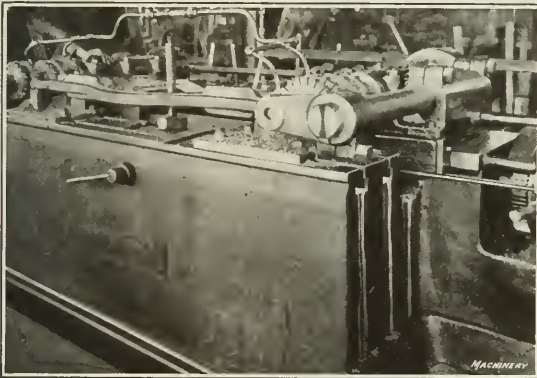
Arrangement of Pipes to deliver Cutting Compound to Two Gangs of Milling Cutters
